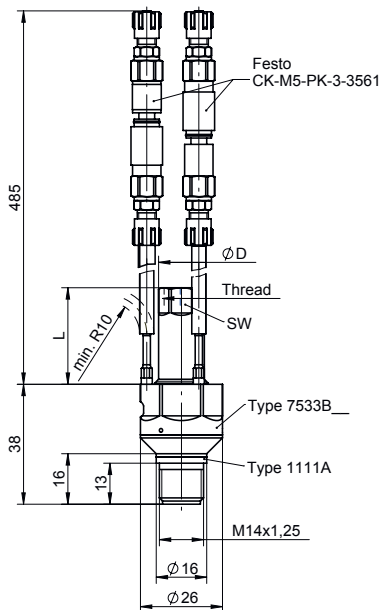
Cooled switching adapter Type 7533B12 for Type 4011A...DS...7
